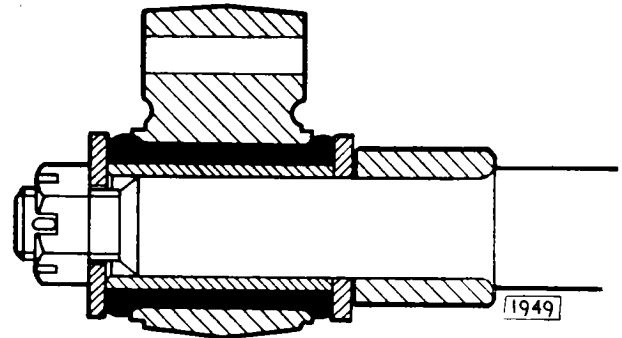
Section through one of the lower wishbone rubber/steel bushed mounting brackets.
